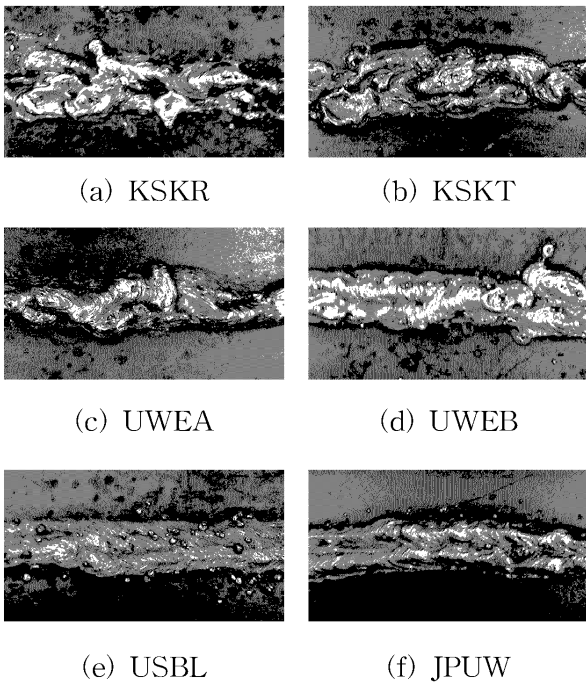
Bead appearance of multi-pass under-water wet arc welds
